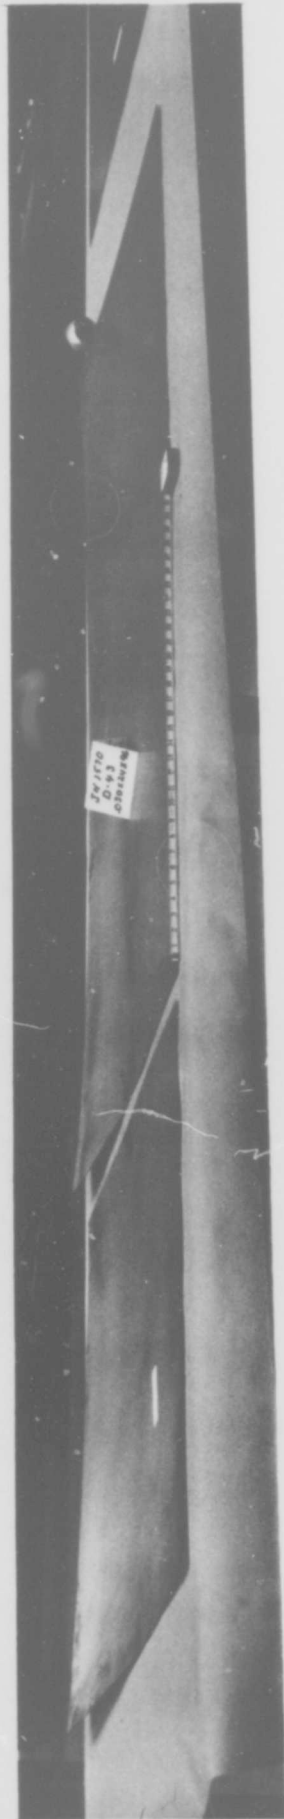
B. D-43 Sheet 0.030" Gage After Shearing
